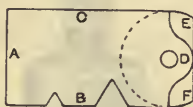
GAUGE FOR MEASURING THREAD-RAKE.
